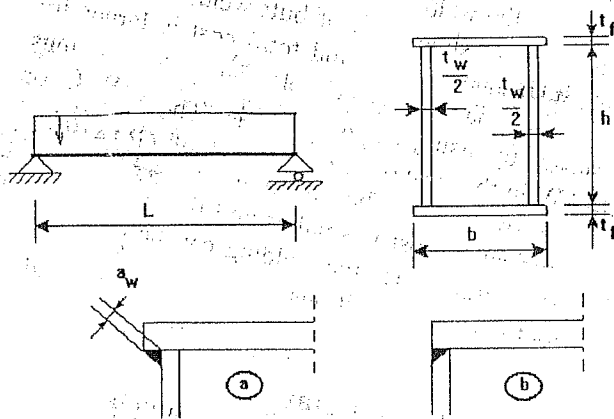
Welded box beam a) with fillet welds, b) with 1/2 V butt welds
